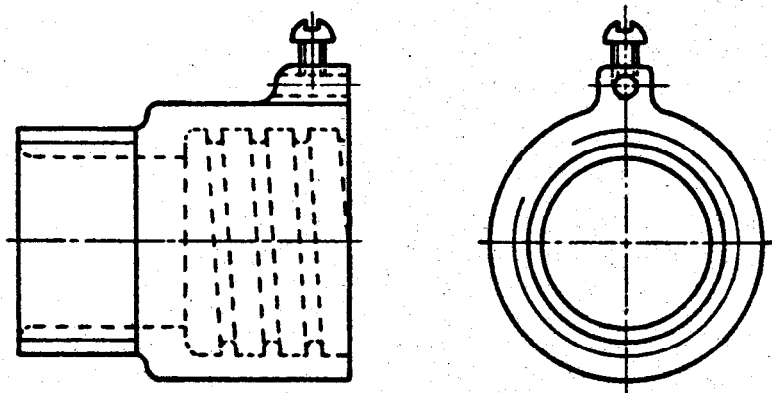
A TYPICAL EXAMPLE OF A SOLID TYPE ADAPTOR WITH EXTERNAL EARTHING SCREW ( THREADED TYPE )
